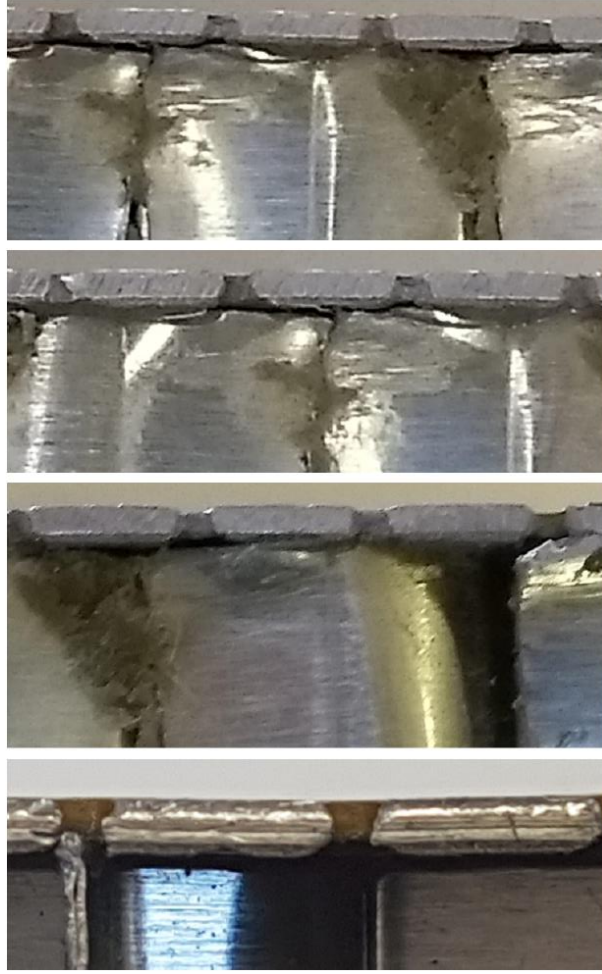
[26] Cross section of a punched aluminium perforate liner. Details on the panel holes.
